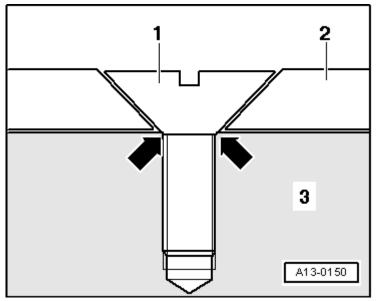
Identifying Attachment Points, Countersunk Screws, Crankshaft & Sensor Wheel Courtesy of VOLKSWAGEN UNITED STATES, INC.
